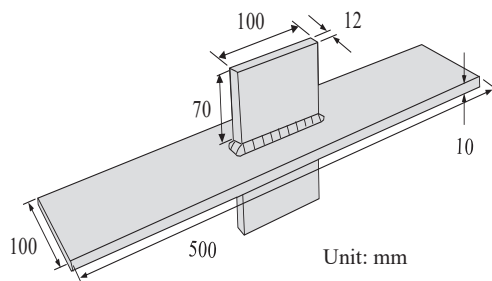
Out-of-plane gusset welded joints specimen
